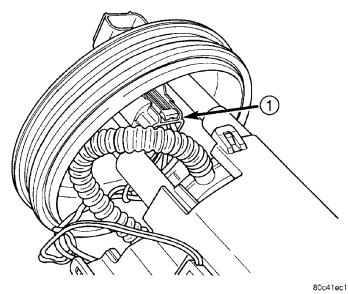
Fuel Pump/Level Sensor Electrical Connector
